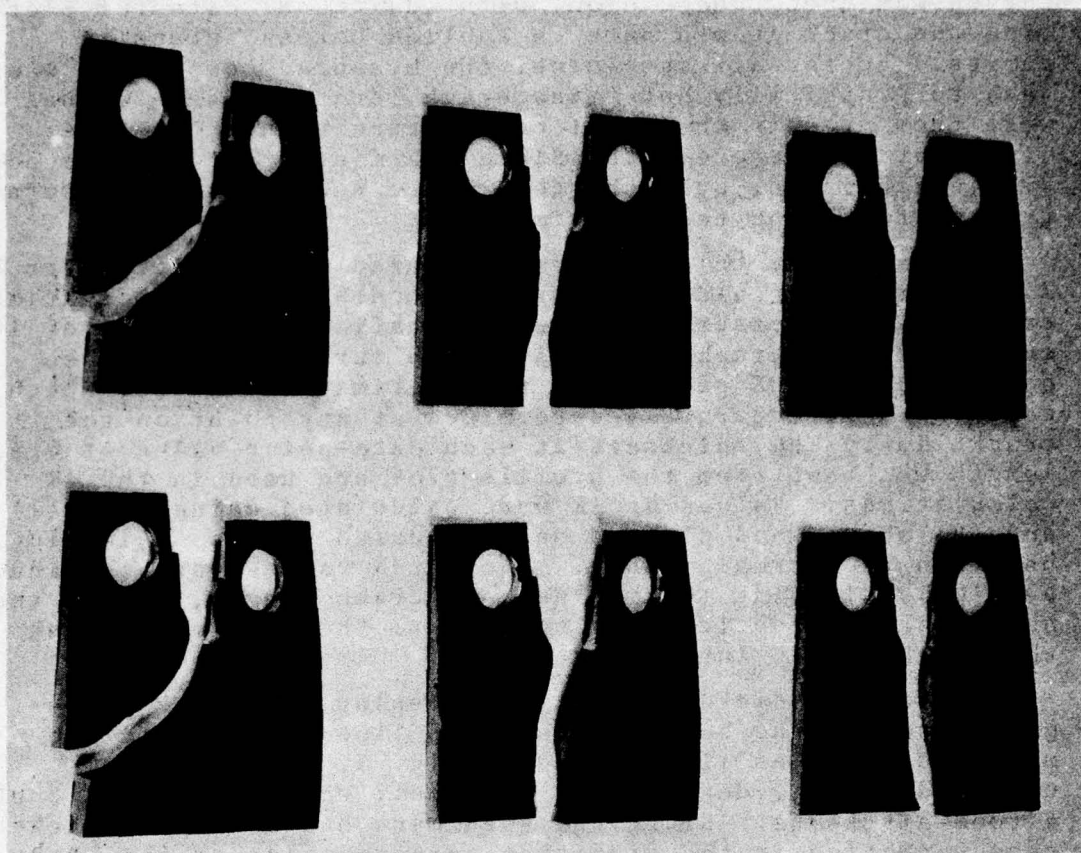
Examples of the fatigue fractured samples. The path of the crack bore no relationship to specimen thickness or the combinations of frequency and environment used.
